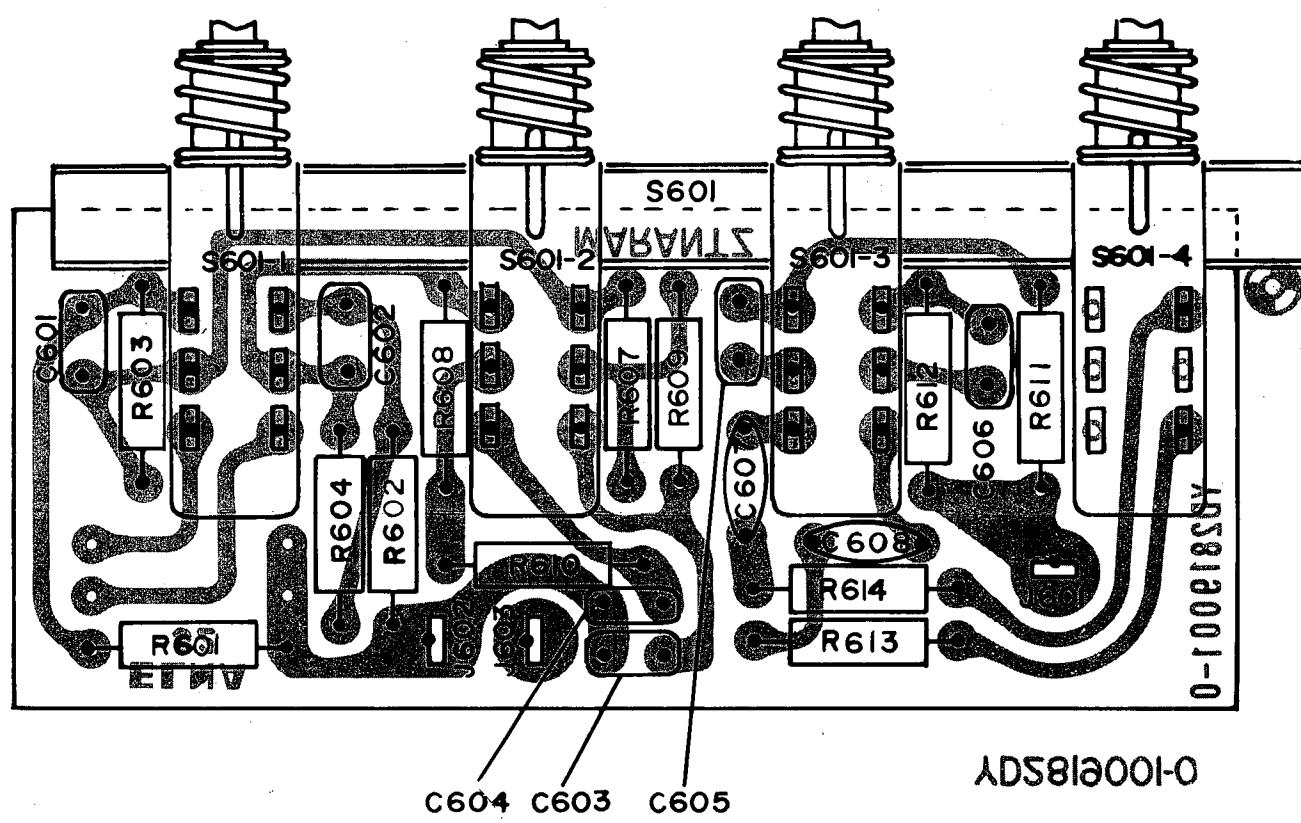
Loudness, Muting, High and Low Filter Switch Unit Assembly P600 Component Locations
